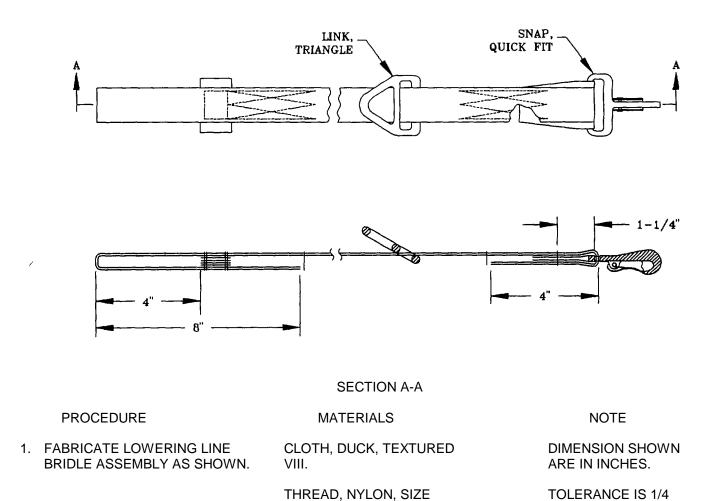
(Container Side Mounted) Lower Line Bridle Assembly
